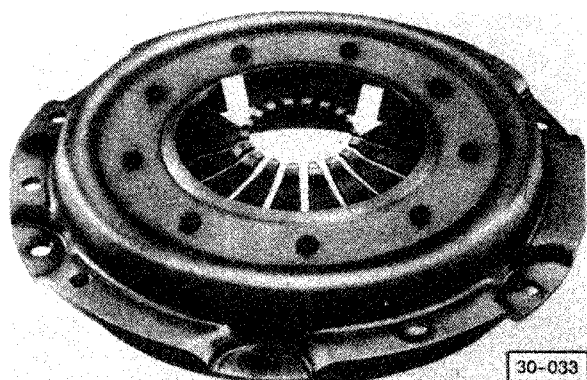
Clutch pressure plate, Gasoline removing/installing
